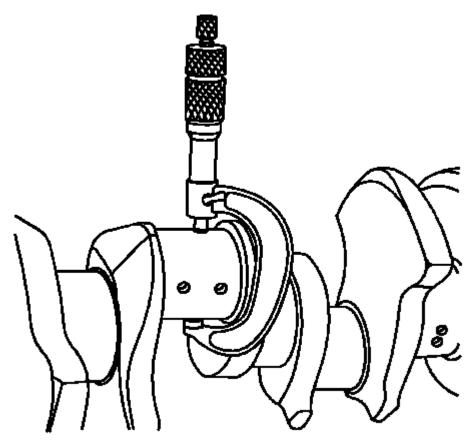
Measuring Crankshaft Journals Courtesy of GENERAL MOTORS CORP.
